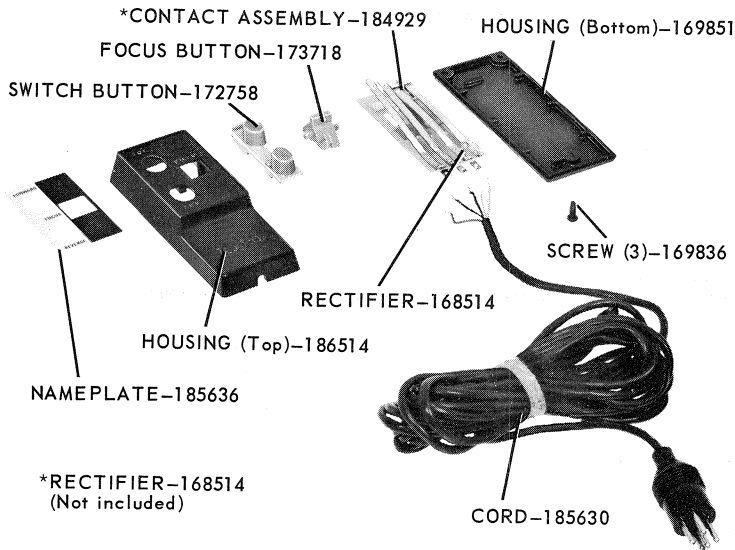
REMOTE CONTROL ASSEMBLY-171054
